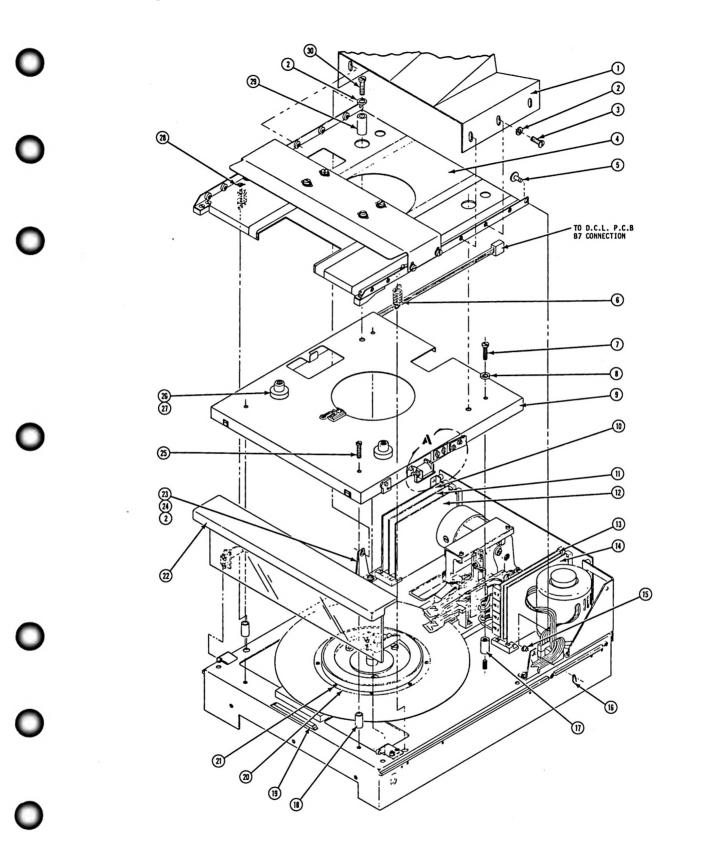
Disc Drive Assembly (74770) Revised: July 15, 1976
